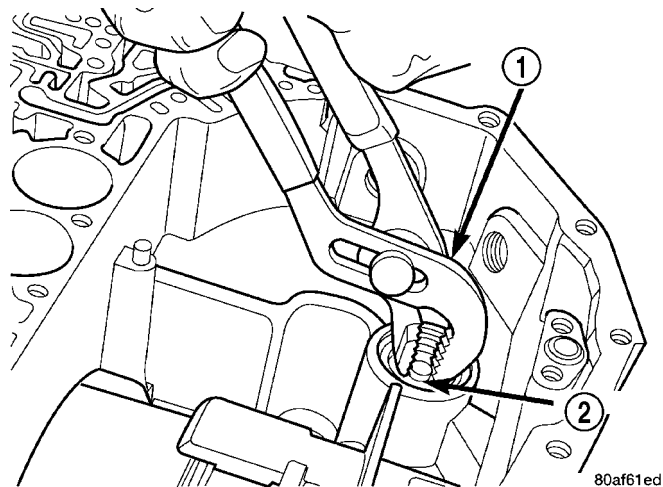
Remove Low/Reverse Accumulator Plug (Cover)
